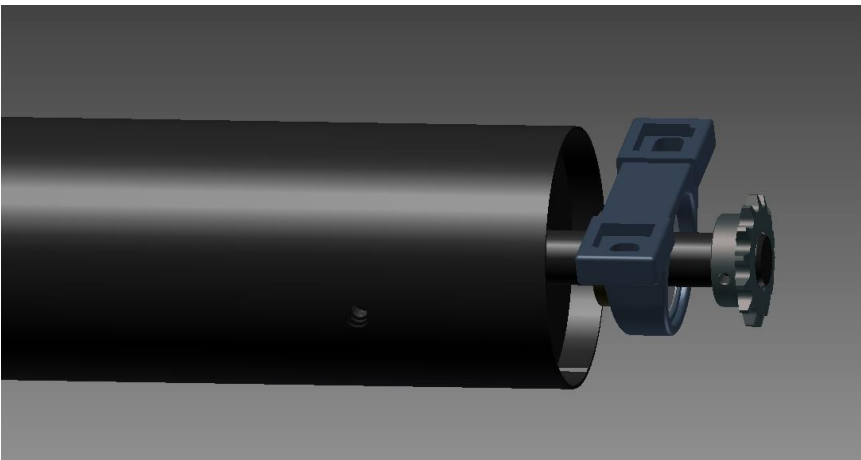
RH AUGER WITH BEARING, LOCKING COLLAR AND SPROCKET WITH KEY.
